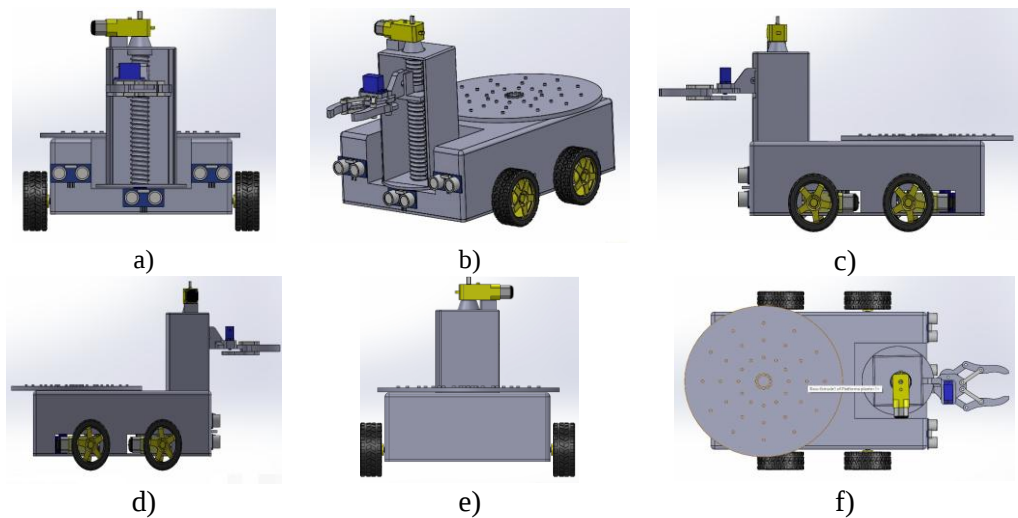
Handling robot a)Front view, b) Isometric view, c-d)Side view, e) Back view, f) Top view
